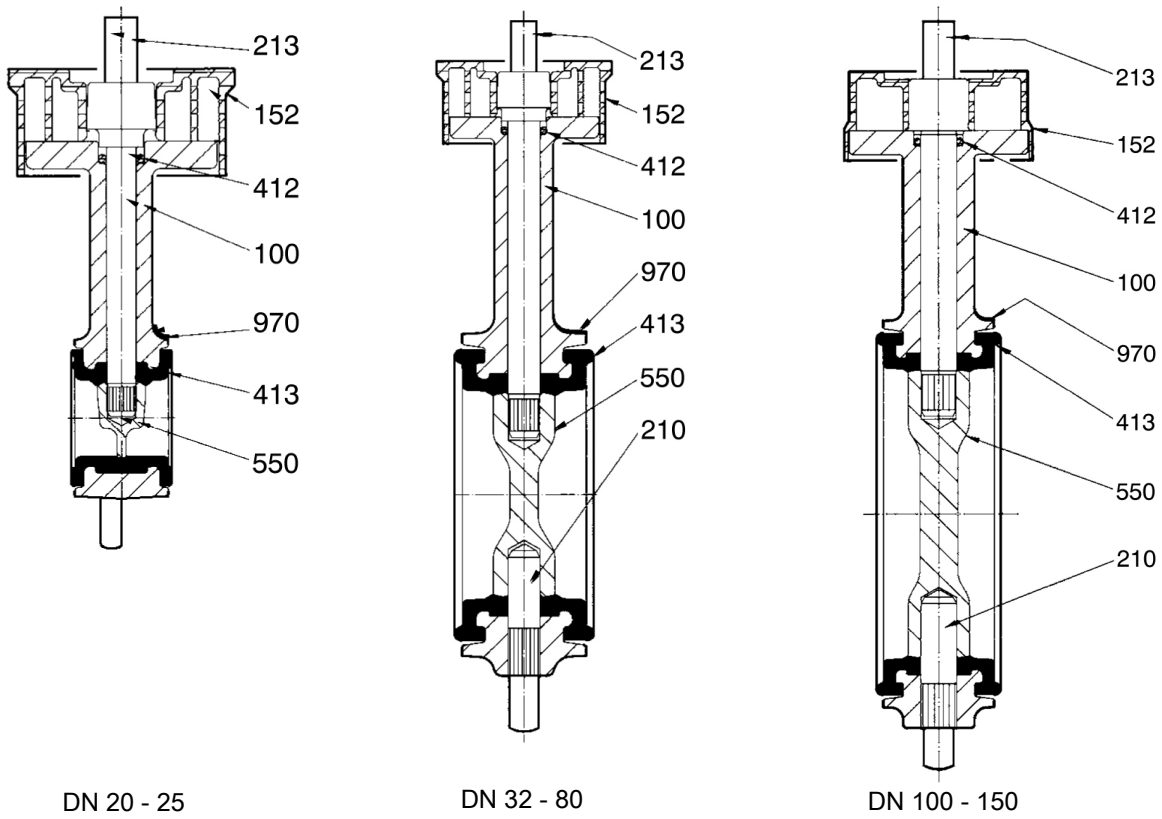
Sectional drawings of BOAX-S/SF DN 20 to DN 150
